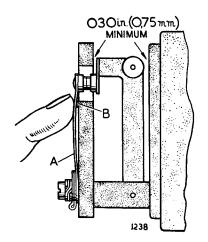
If the contact blade "A" is held against the projection "B" there should be .030" (0.75 mm.) gap between the white rollers and the body of the pump. If necessary, set the tip of the blade to obtain the correct clearance.
